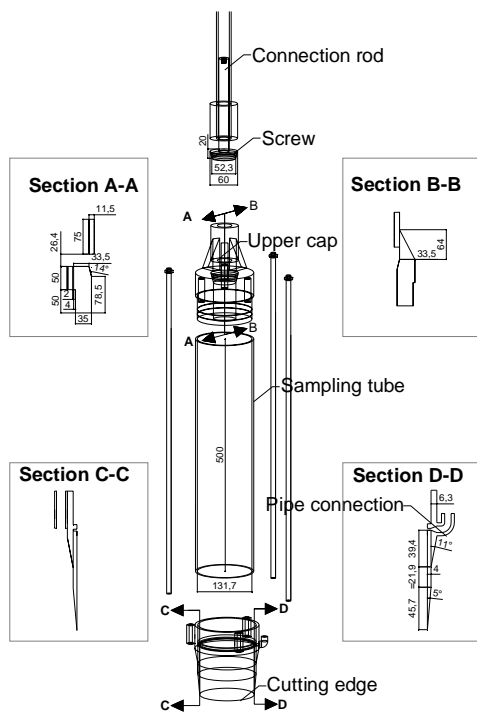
TUT 132 mm tube sampler. Dimensions are in mm.
